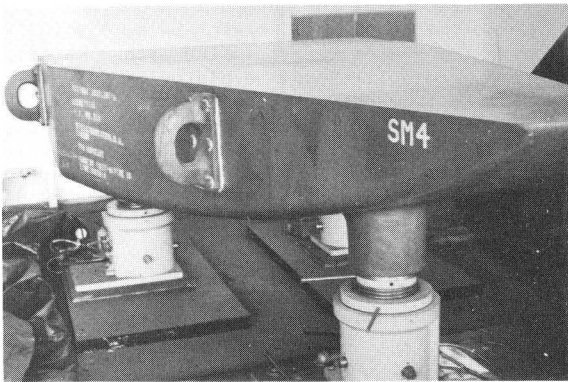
First stage of mechanical assembly of proto-type sector magnet.
